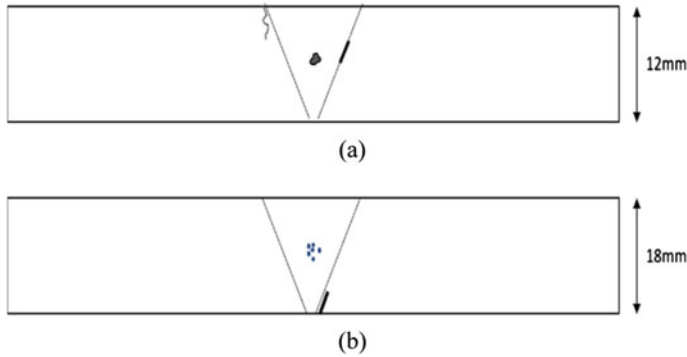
Schematic of the weld specimens with defects: a specimen 1, b specimen 2
